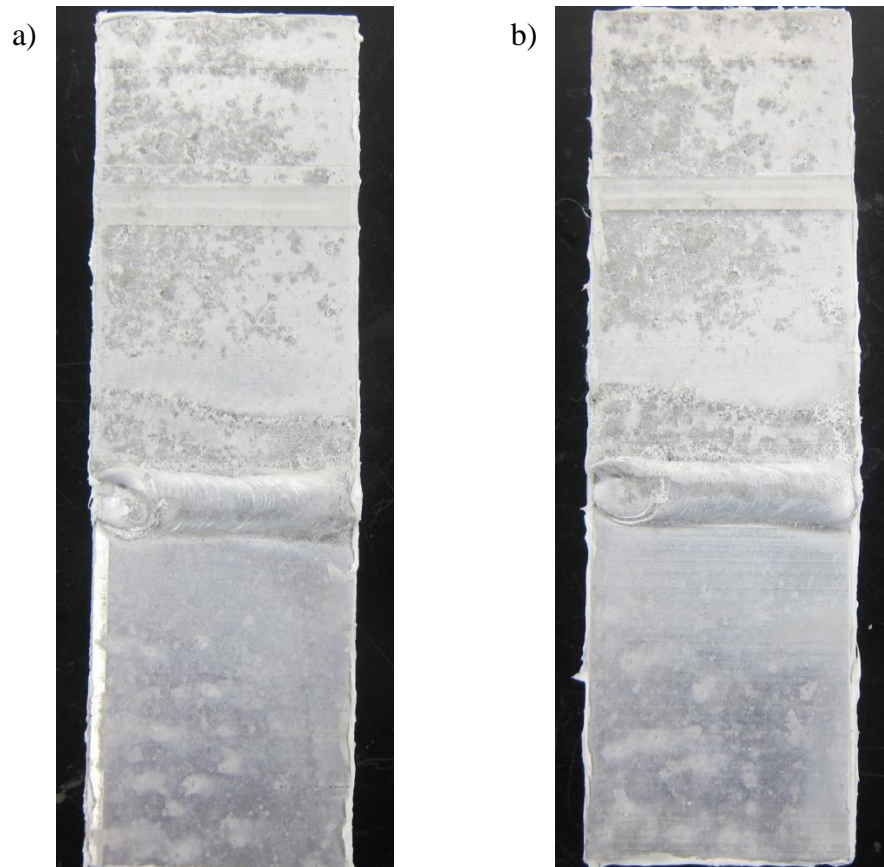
Duplicate samples of lap-joint welded configuration I3 (ER5356/AA7108/≡) in the as-welded T6+PB condition.
